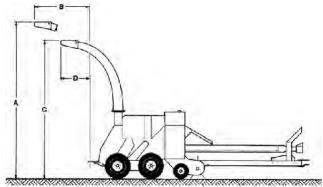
Discharge Spout Dimensions: (A) Lift with Extensions 148 in (3700 mm), (B) Reach with Extensions 103 in (2575 mm), (C) Lift 123 in (3075 mm), (D) Reach 38 in (950 mm).
